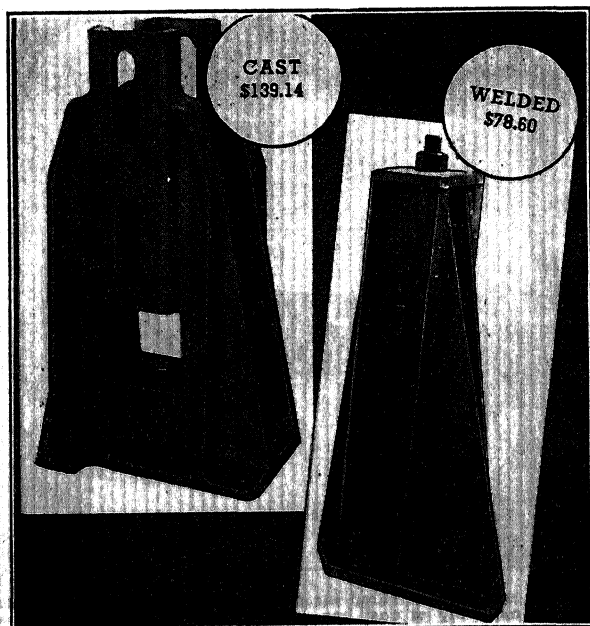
The cast steel take-up stand for a crawler shovel was converted to the simple welded steel design shown at a saving of \$60.54. Weight was cut 34%.
